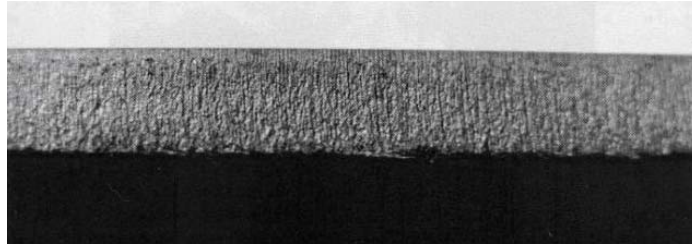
A typical example of a stainless steel cut edge (4 mm thick) produced by oxygen cutting. /25/
